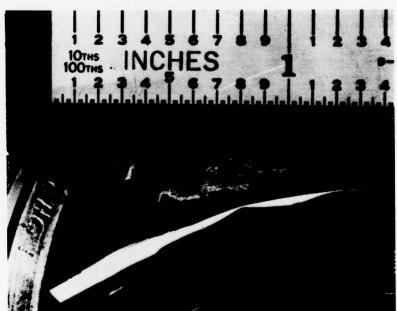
Sump output gear teeth (drive side) showing light scoring after 25-minute loss-of-lube test of optimized transmission configuration number 1.
